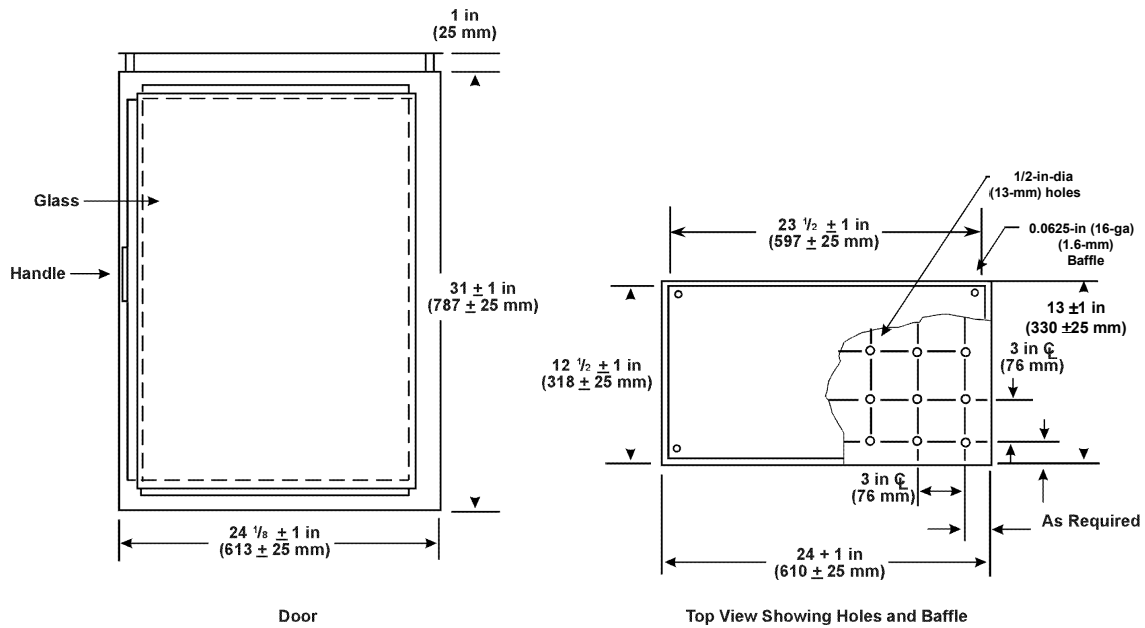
Front and Top View of Horizontal Bunsen Burner Test Cabinet
